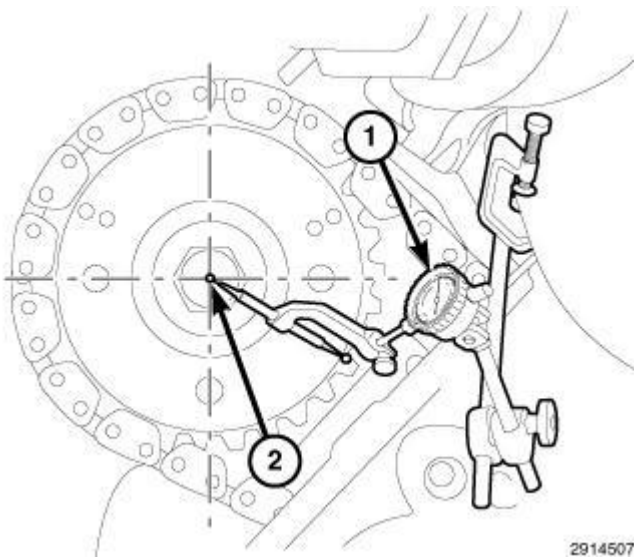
Positioning Dial Indicator Tip Against Camshaft
